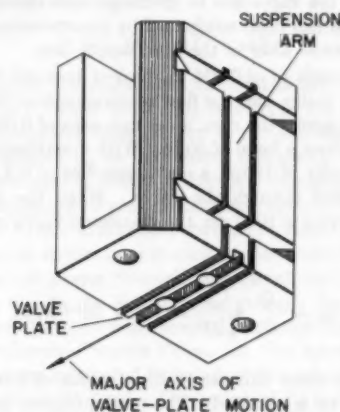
ISOMETRIC VIEW OF VALVE SUSPENSION UNIT
